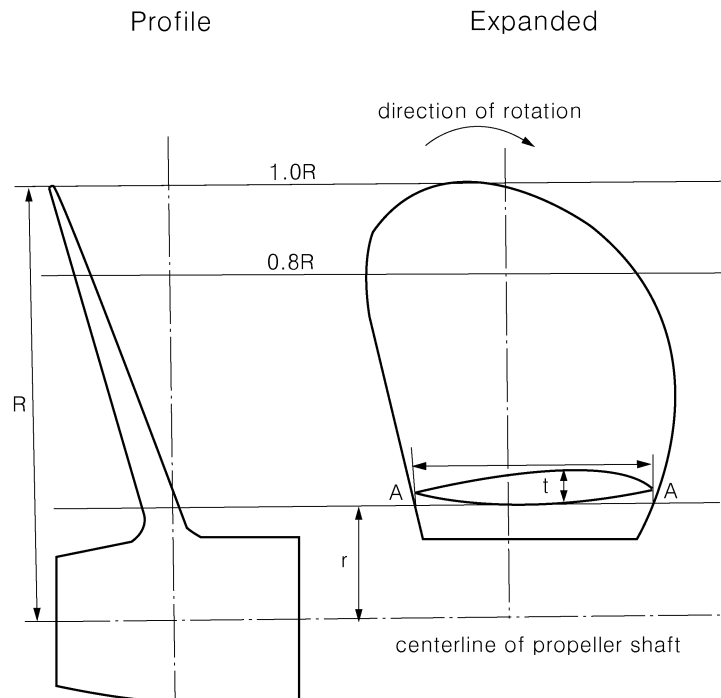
Dimension of propeller section for calculation of blade failure load
